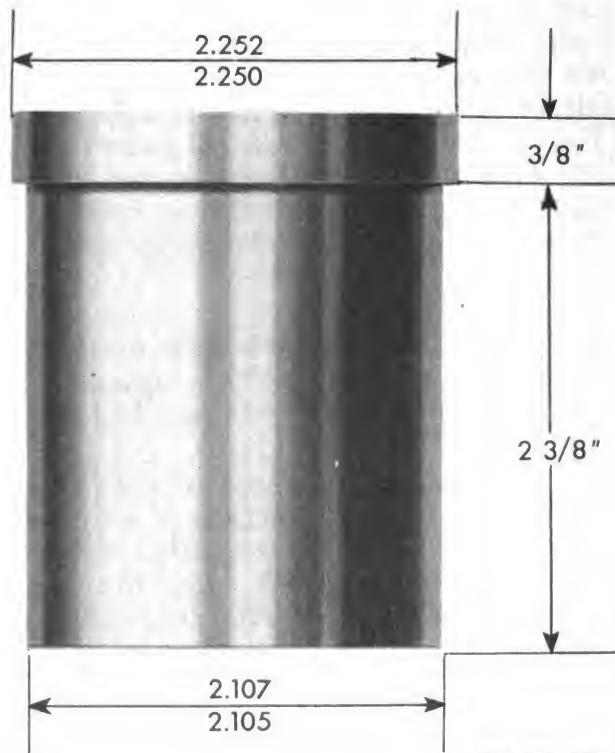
Camshaft Bushing Removing and Replacing Tool
